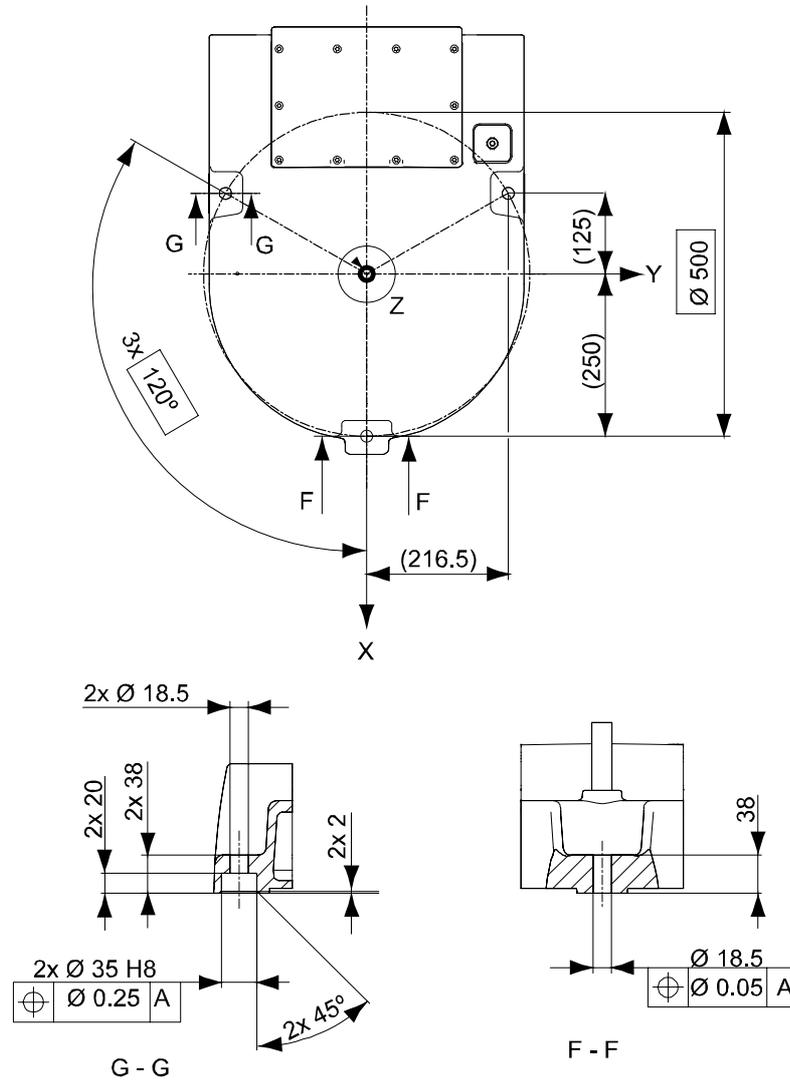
Hole configuration for robot base (dimensions in mm). View from the bottom of the base.
